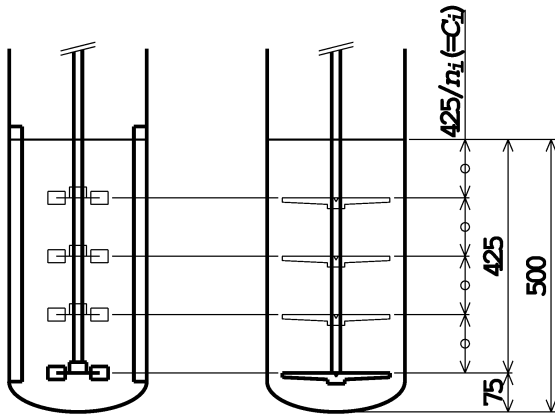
Arrangement of impellers in multi-stage fashion. Dimensions in mm.
